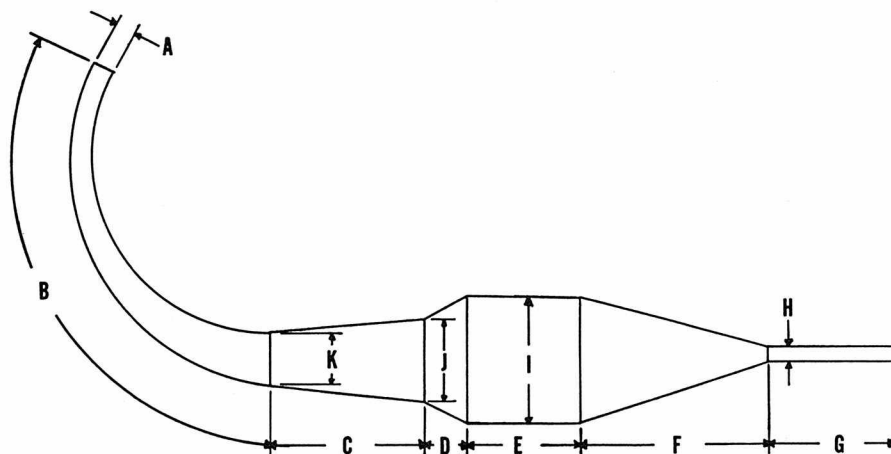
Basic expansion chamber diagram. Chambers vary greatly from one engine to the next due to type of riding to be done and variations in engine design. Refer to text for dimensions of particular models.
